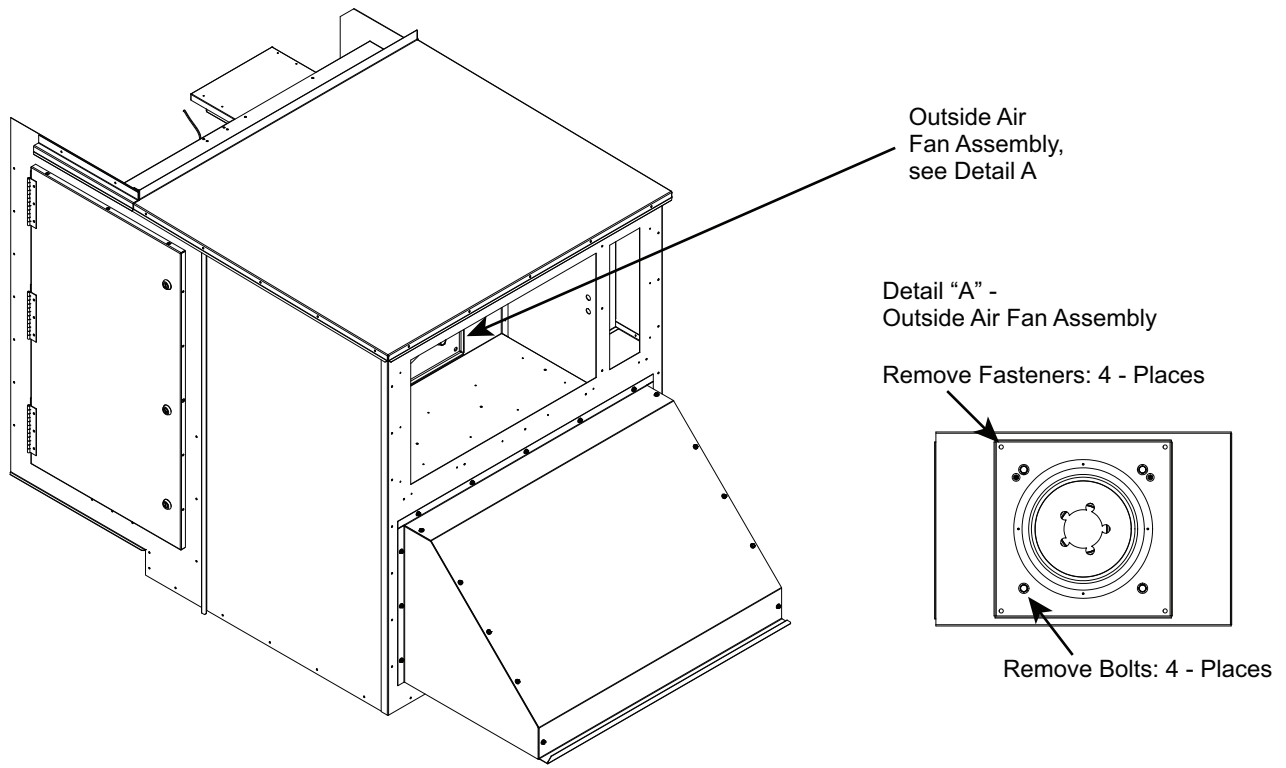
Remove Fasteners from Corners of Outside Air Fan Assembly
